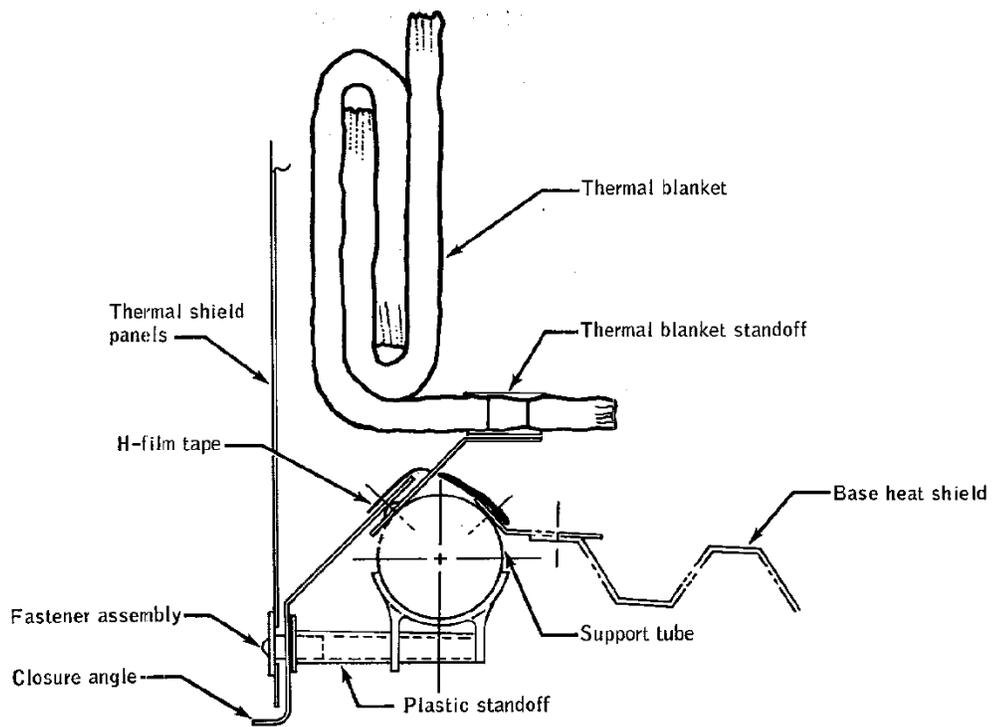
Cross section of the lower aft equipment bay meteoroid bumper.
